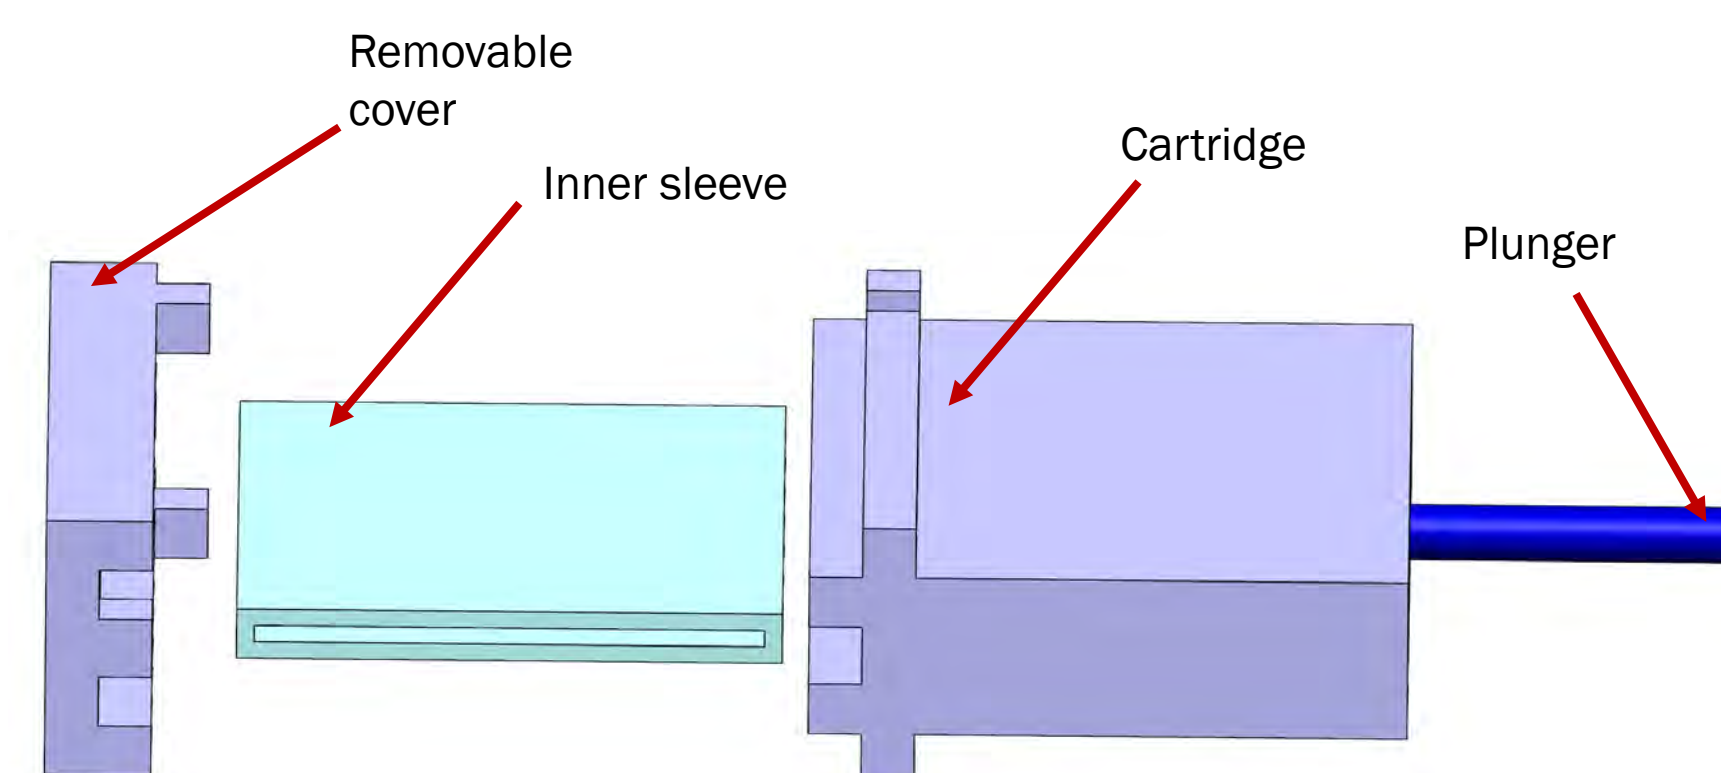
Third prototype to insert paper into the housing. The cartridge was loaded with photo paper inside a film changing bag, then pushed into the housing. The inner sleeve with paper would drop into the bath. The addition needed more fluid and added points that light could enter.
